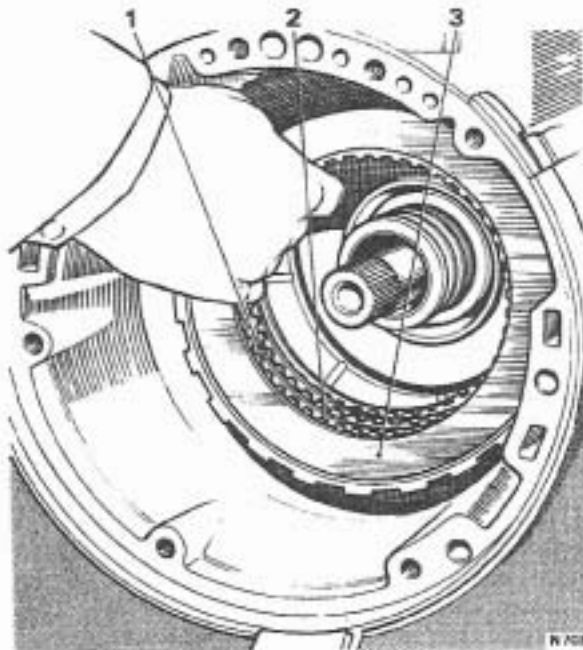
FITTING THE INTERMEDIATE CLUTCH PLATES
